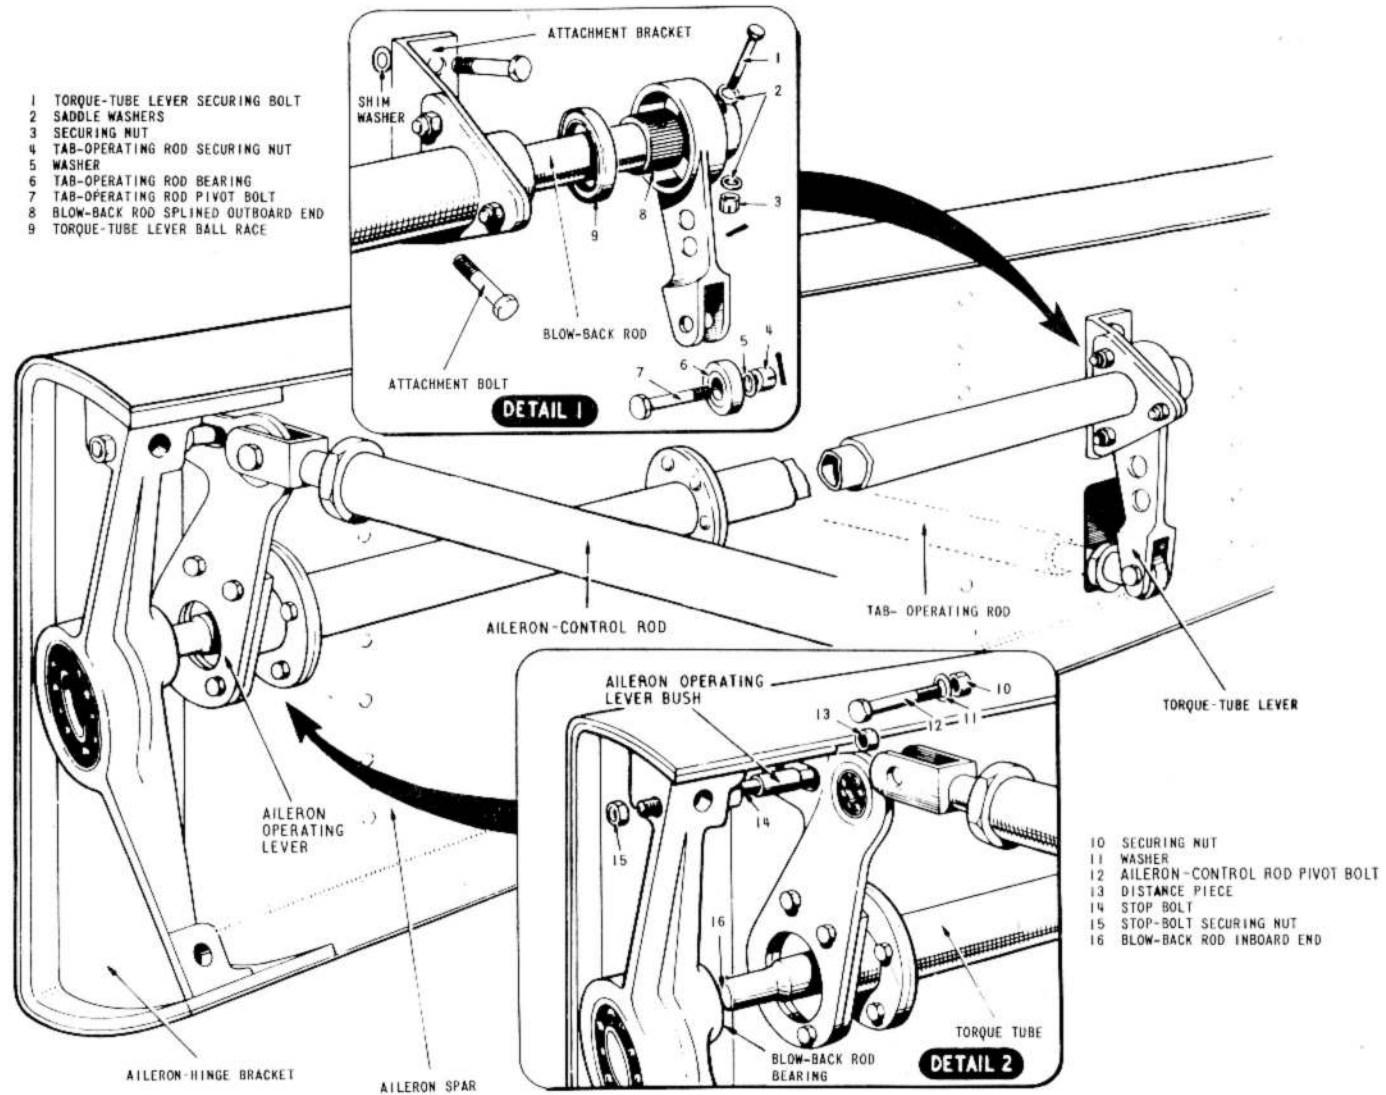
AILERON SPRING TAB MECHANISM REMOVAL
